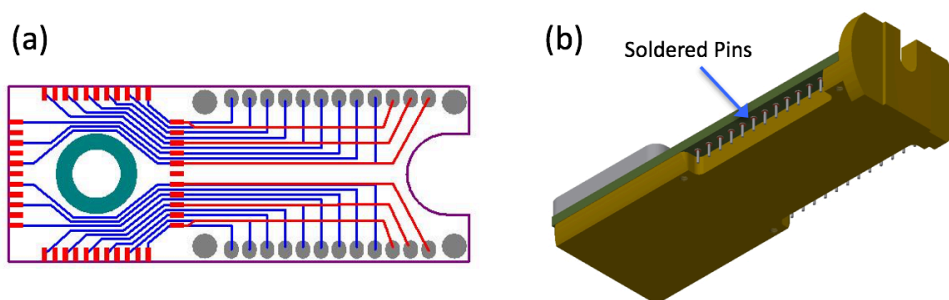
An illustration of the current-carrying tracks on the custom PCB from the pins under the chip socket (on the left) to the soldered pins (on the right). (b). An illustrated design image of the bottom of the cold finger with two banks of protruding metal pins. These were carefully wired with the thin manganin wires.
